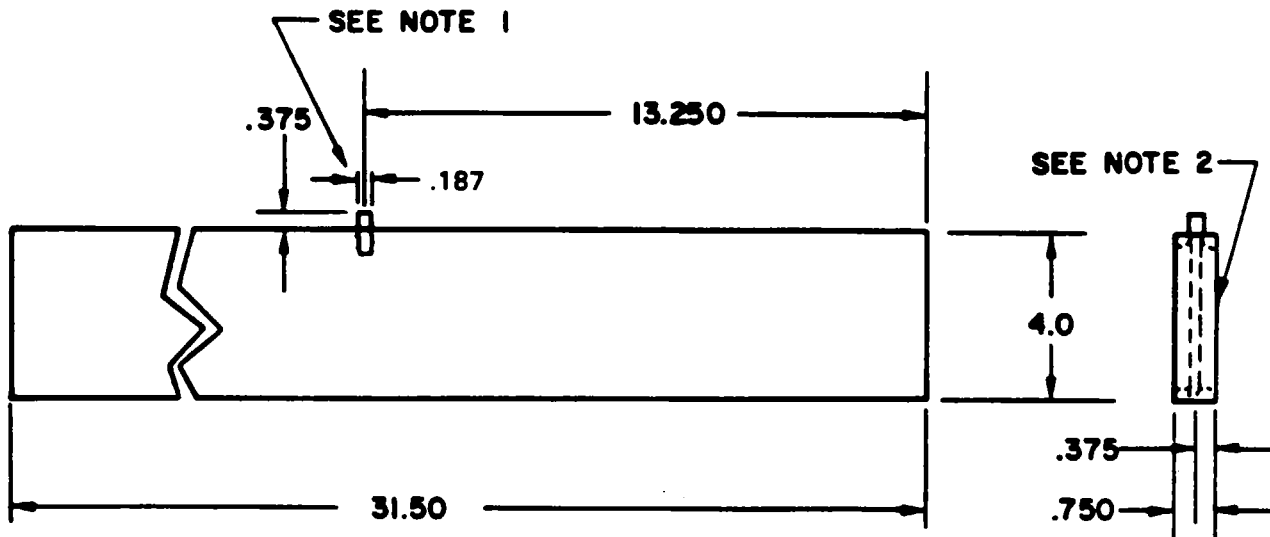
Fabricated Aileron and Flap Rigging Tool
